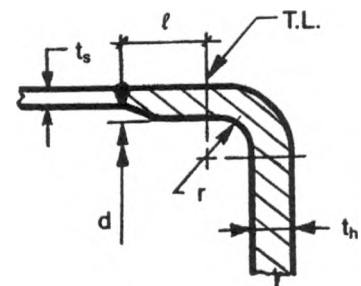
Case 1: Flanged head [1, Figure UG-34 (a)].
